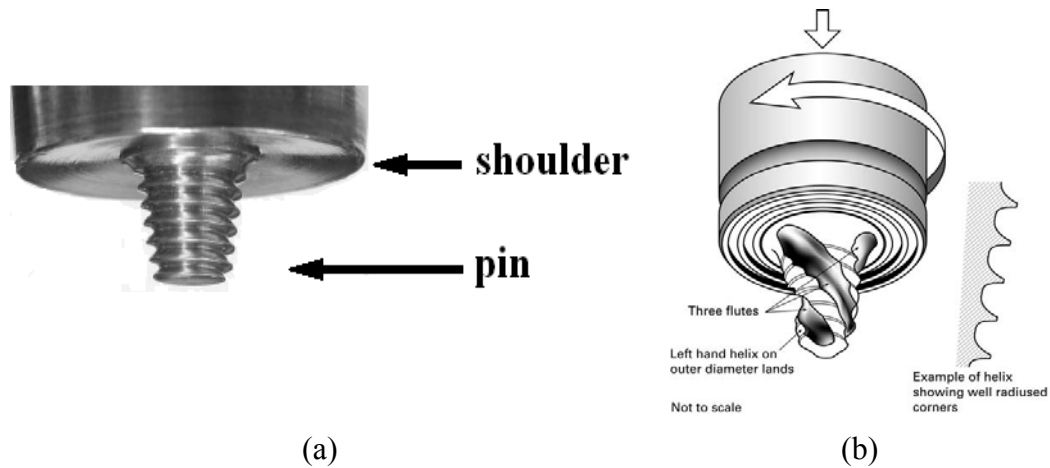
FSW tool for CFSW [12] (a) Threaded tapered pin with a concave shoulder
